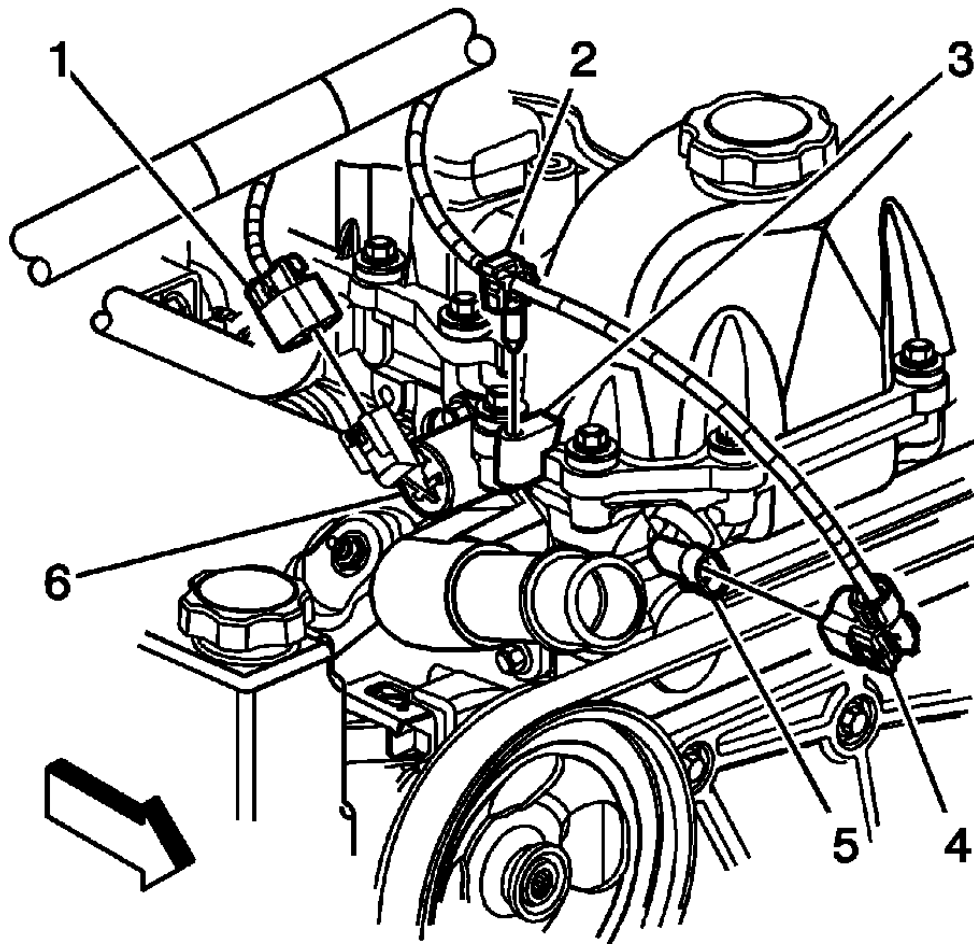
View Of CMP Sensor Connector, Exhaust Camshaft Actuator Connector & Engine Wiring Harness Retainer
